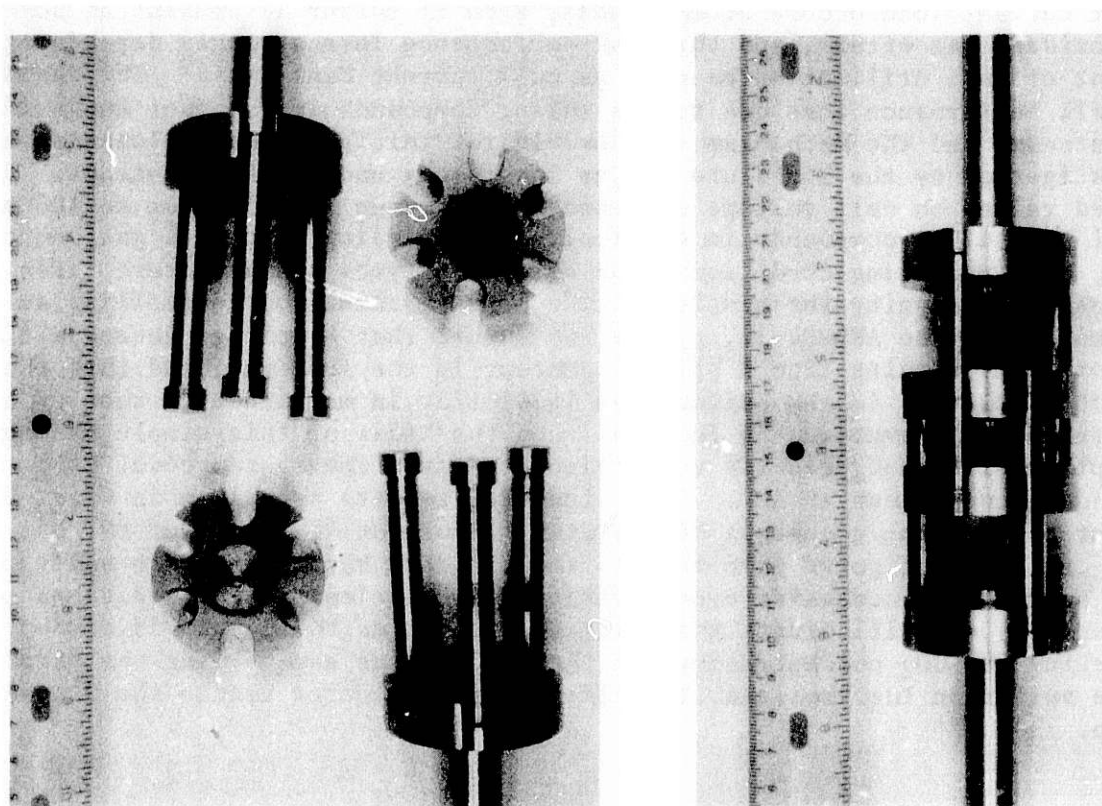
Compression Cage for Anode Creep Tests Assembled (right) and Disassembled (left). The black clay represents the test specimen.
